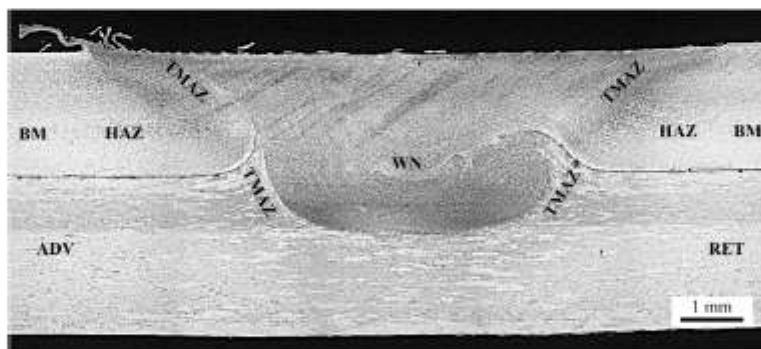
Cross-section and microstructural zones of a friction stir welding (FSW) lap joint produced using a conventional threaded tool at 1200 rpm and 250 mm/min. Tool translation movement was forward from the shown cross-section.
